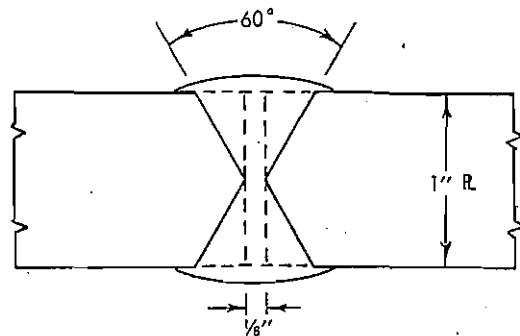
Transverse shrinkage of this weld can be closely estimated from computed cross-sectional area of the weld.
